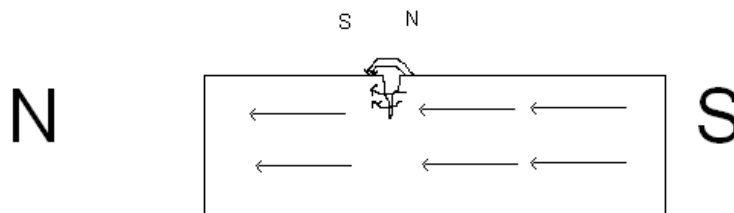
MAGNETIC PARTICLE INSPECTION
